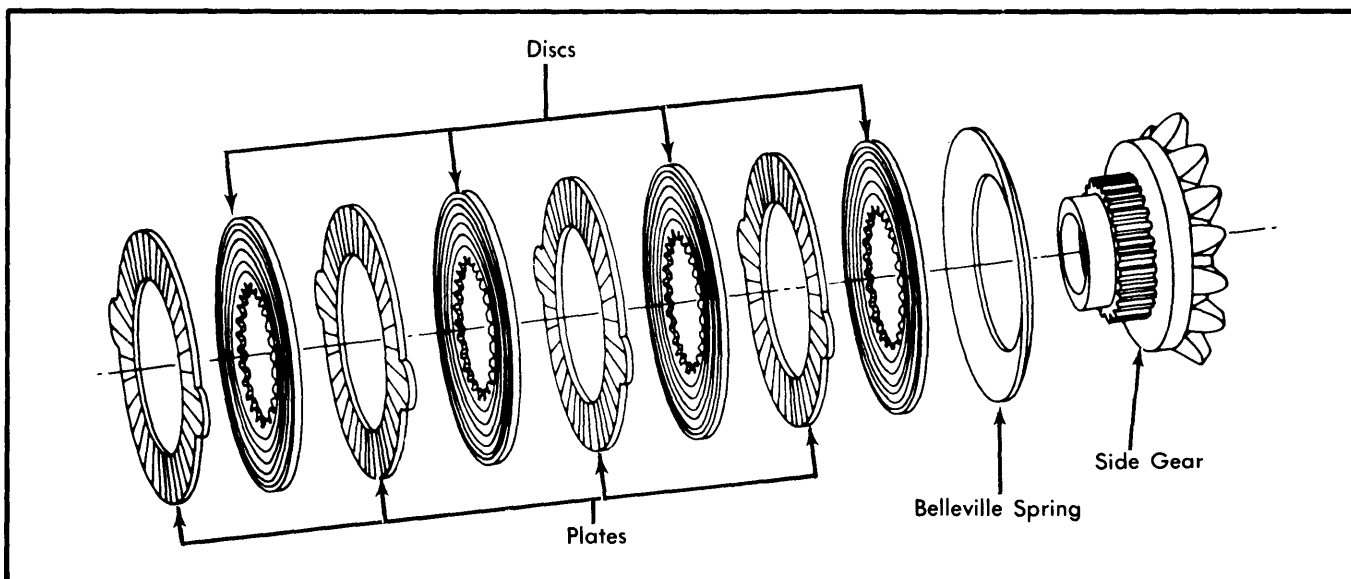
View Showing Typical Clutch Pack Arrangement (Not All Combinations Shown)
